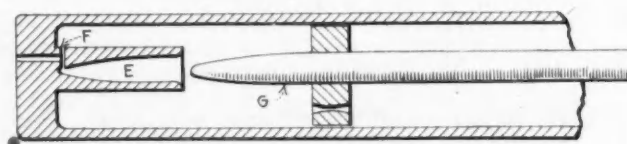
ENLARGED VIEW OF COUNTER RECOIL BUFFER
